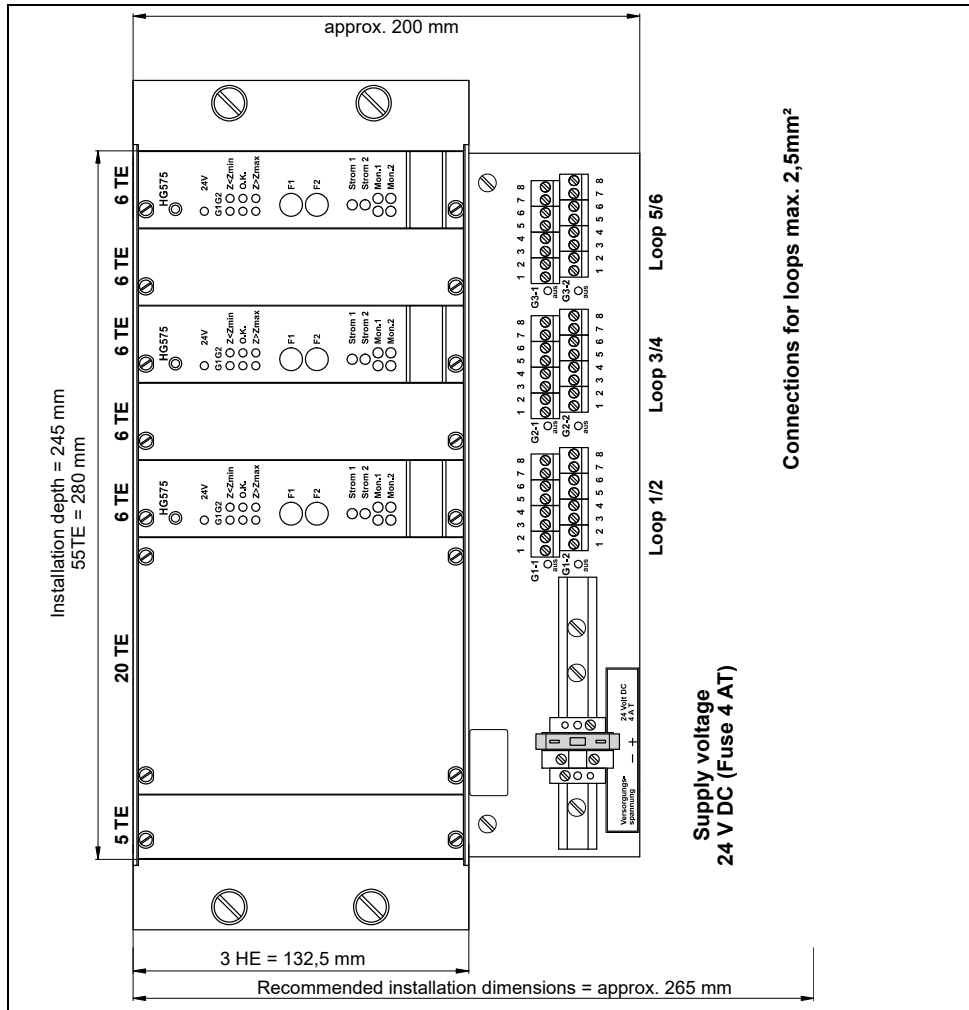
Drawing of rack HG 93160YA (3 HG 57500) with dimensions
